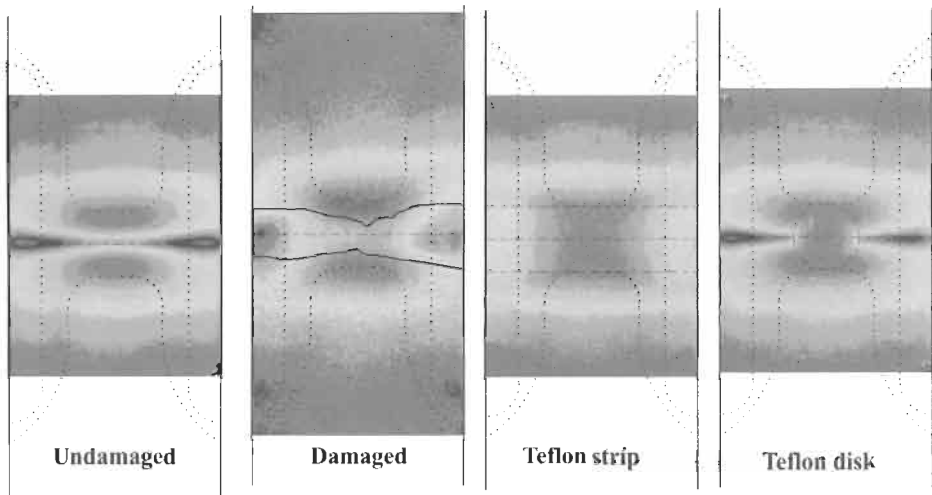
FAST images of F-111 lower wing skin coupon specimens. [40]
